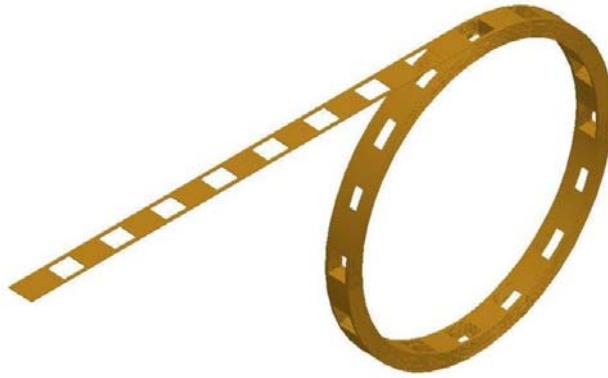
Process of winding up the rotor core out of strip of electrical steel
